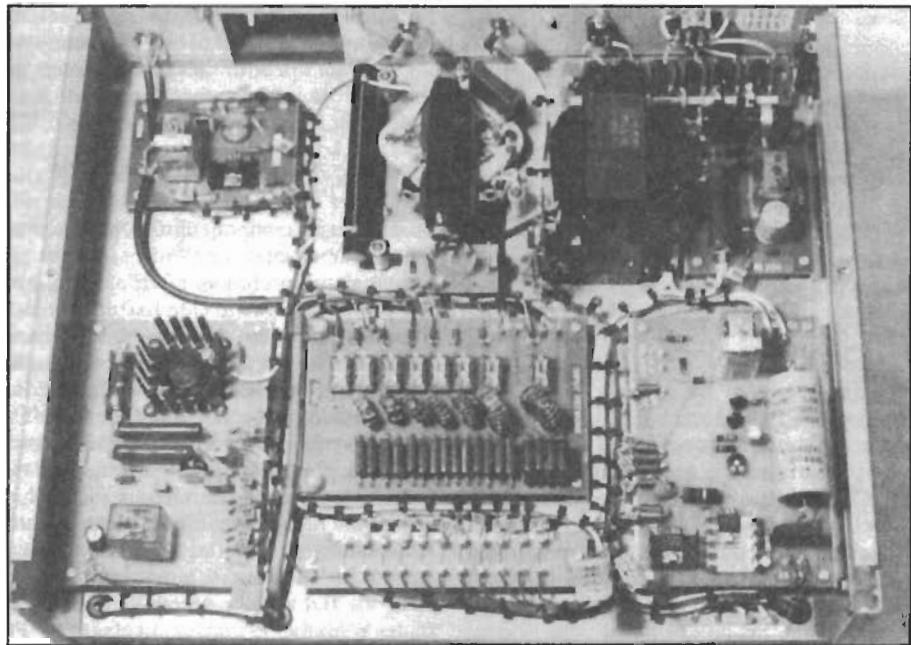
Bottom view of the RF deck showing harness wiring in place.
